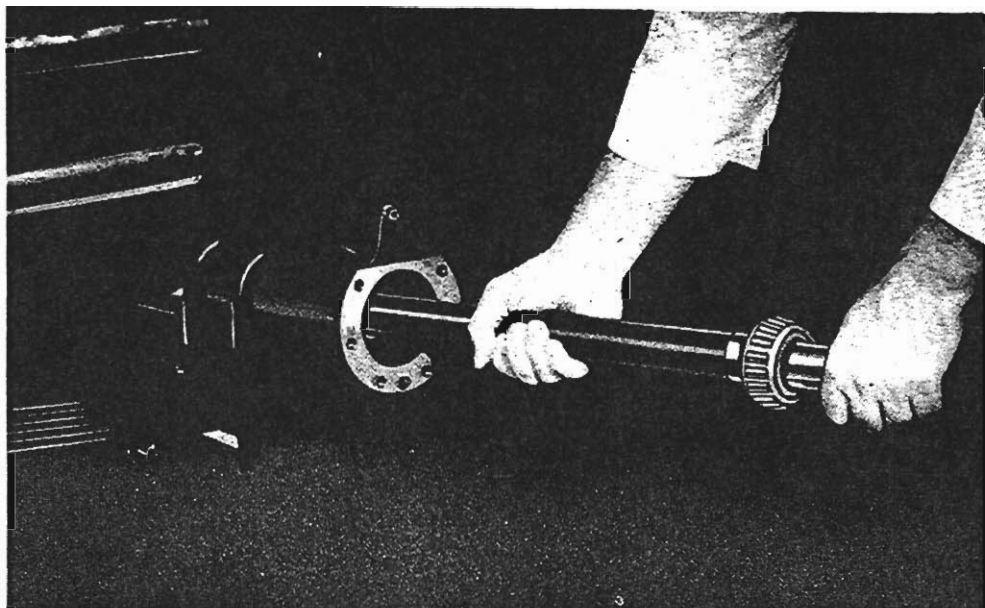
Pack Axle Shaft Bearing with Two Ounces of No. 3 Fiber Grease
